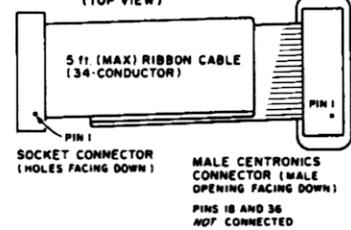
How to build the cable assemblies J1 and J2 (top view).
